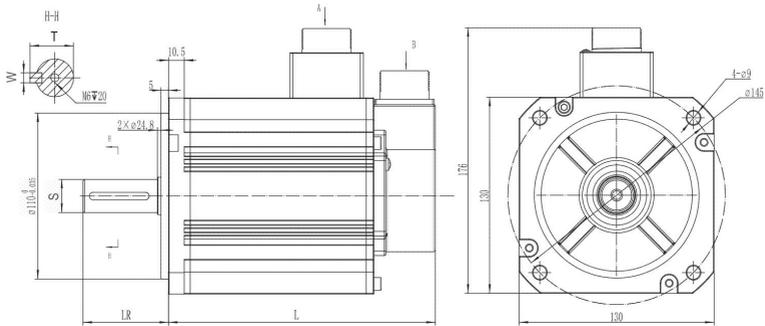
Outline and dimensions of frame No. 130 medium-inertia servo motor
